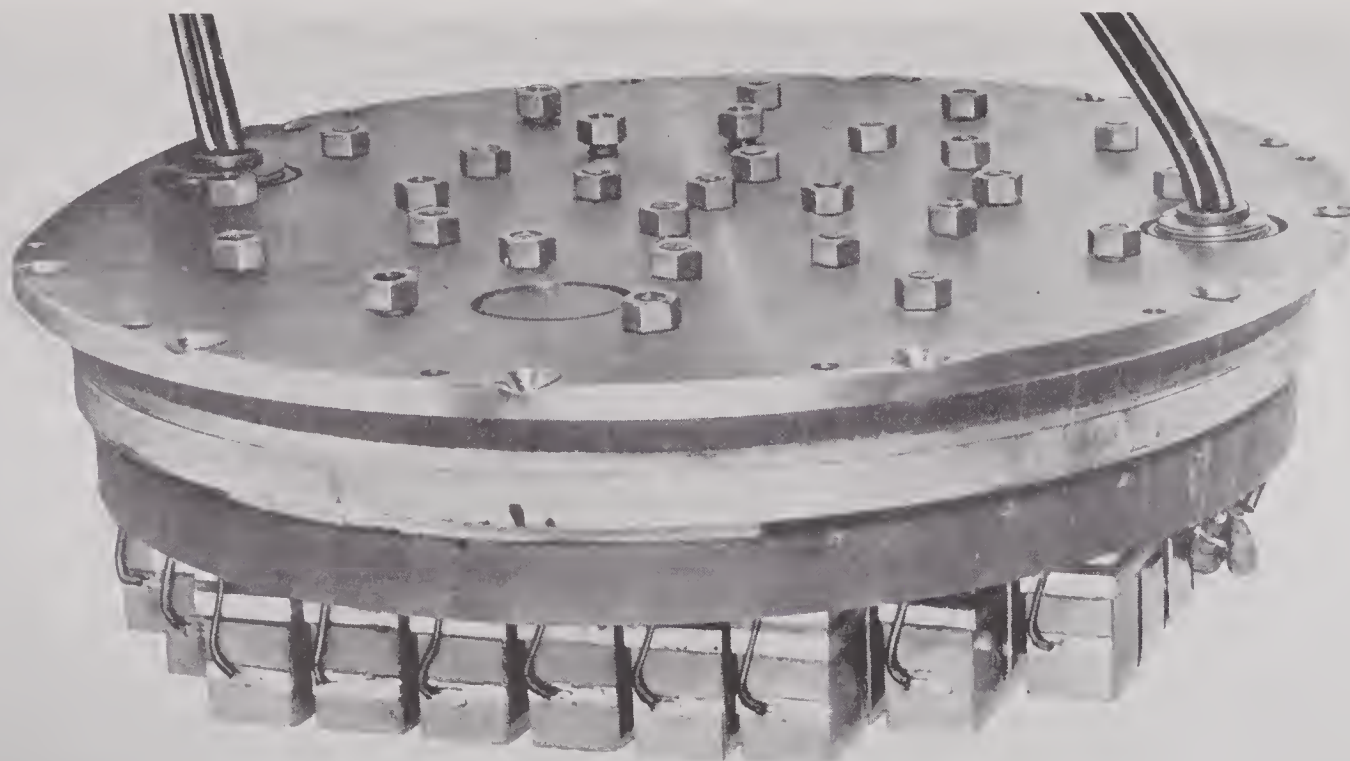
Completely assembled motor mounted on rubber sandwich ready for insertion in case. Tightening the various bolts compresses the rubber so that the section of case containing the crystals may be oil-filled. (NRL.)
